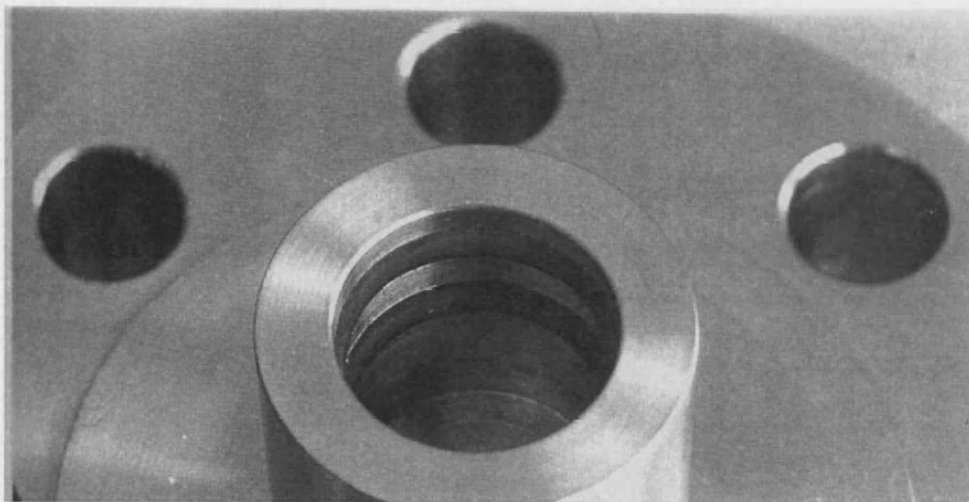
Reactor Flange Showing Double O-ring Seal
